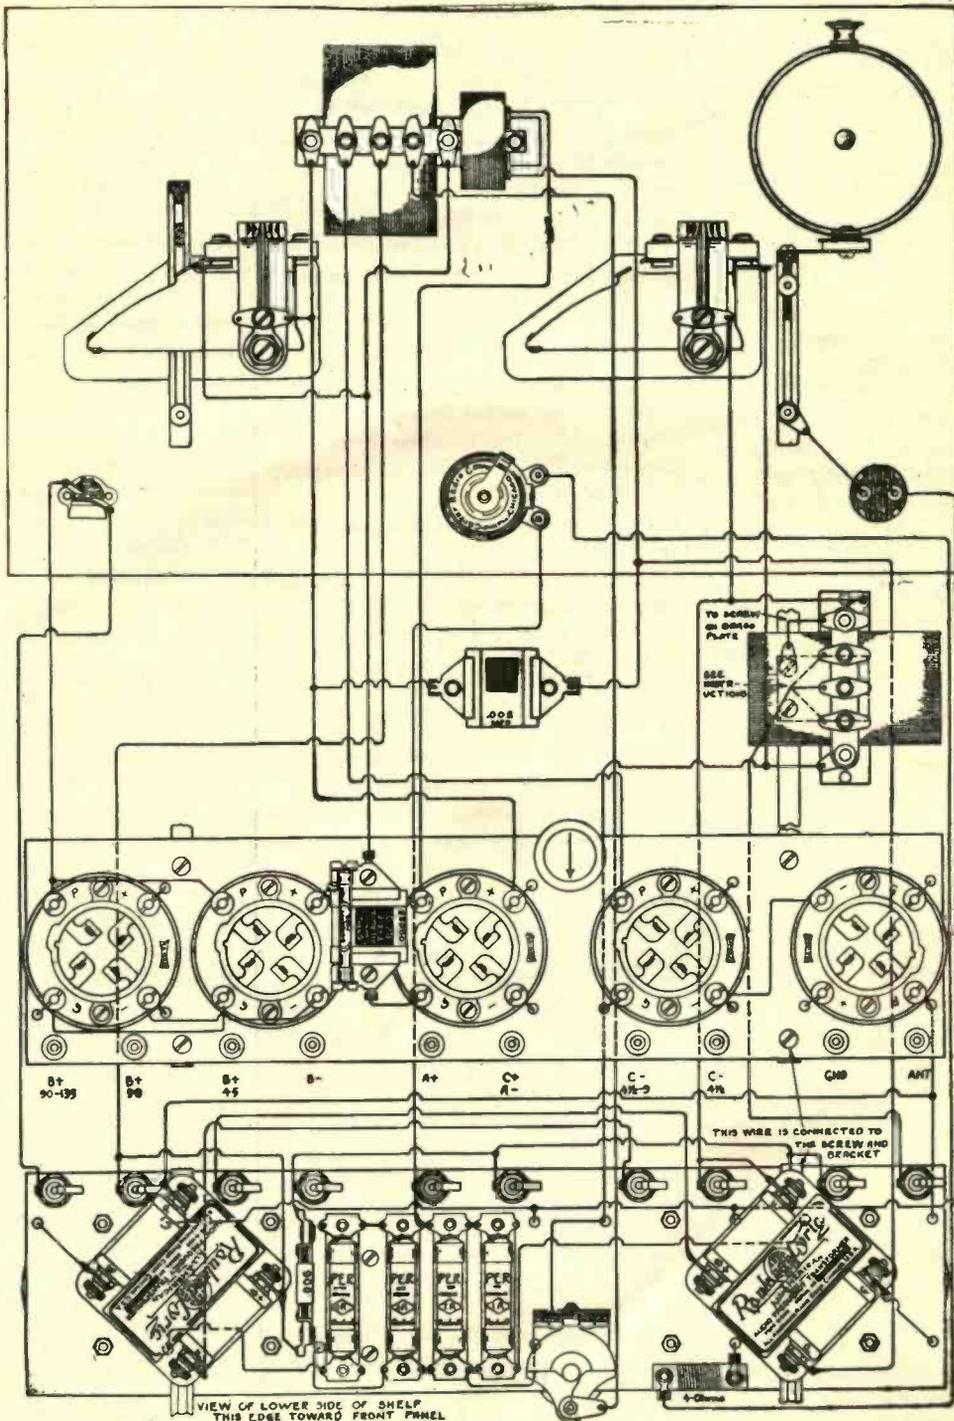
Here is the Complete Wiring. The Upper Part Shows Rear View of the Panel; the Center is Top of Sub-base, While Bottom is the Assembly Underneath.
